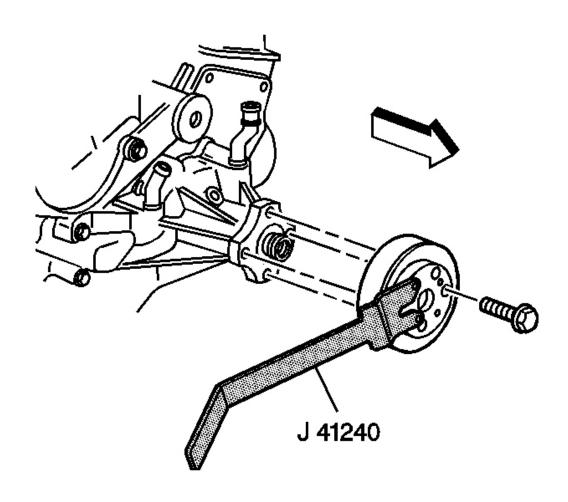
View Of Fan, Water Pump Pulley & Bolts Courtesy of GENERAL MOTORS CORP.
